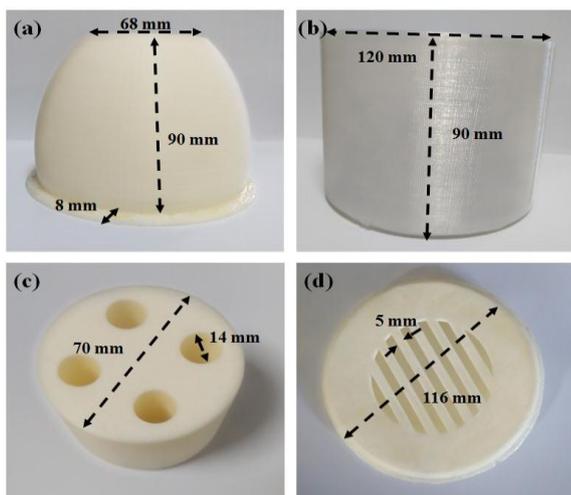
3D printed parts of centrifuge (a) bottom case, (b) top case, (c) sample holder and (d) top case cap.
